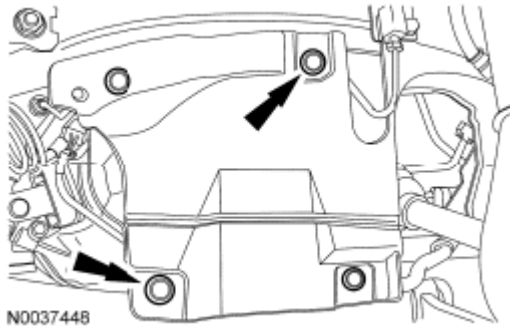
Locating Pin-Type Retainers & LH Splash Shield
